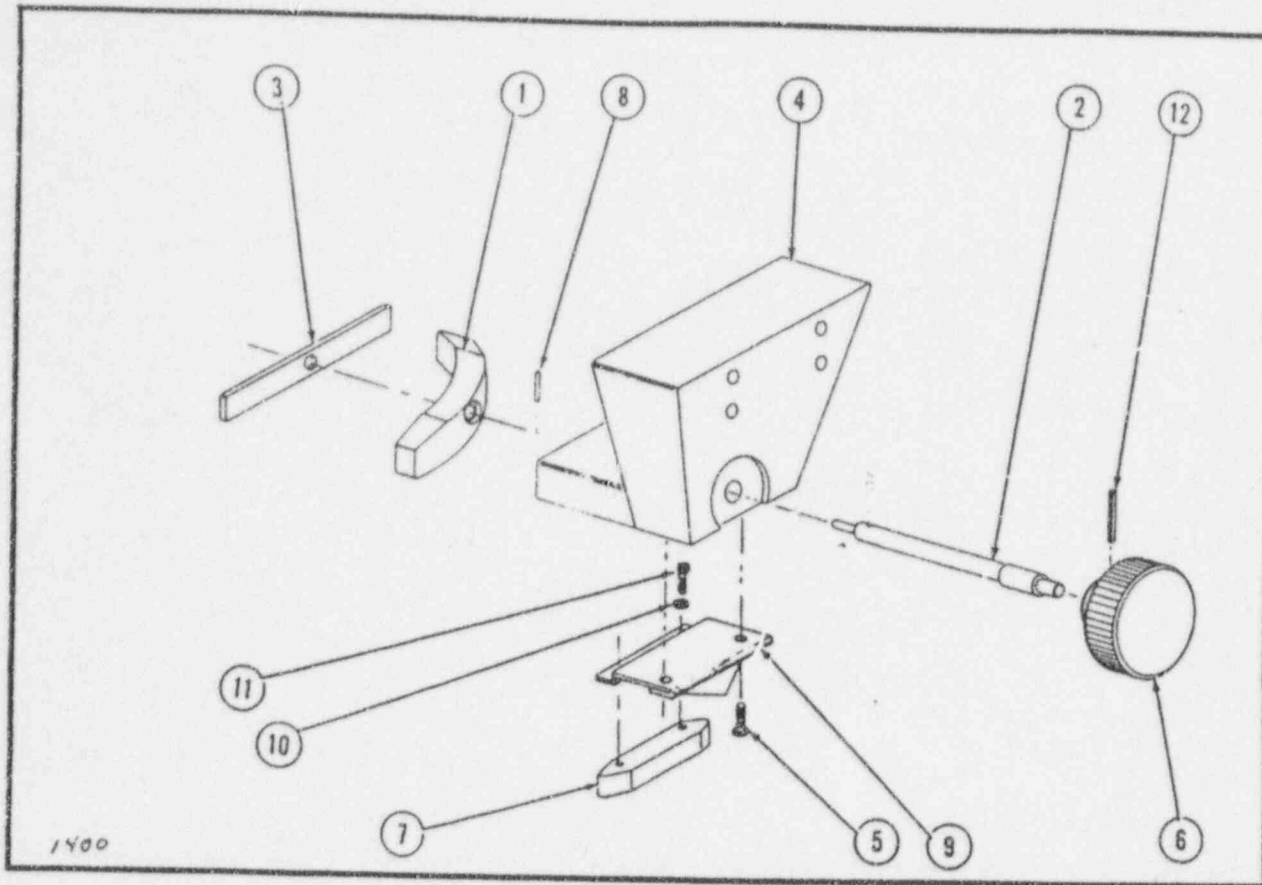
ROTATIONAL BRAKE - Part No. 181464
